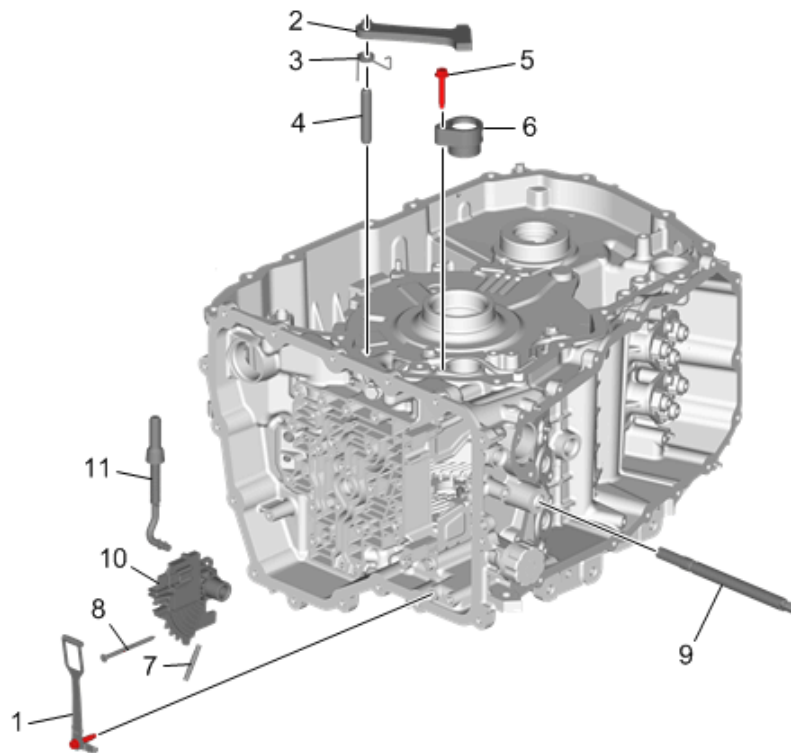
Manual Shift Detent Lever With Shaft Position Switch Assembly And Park Pawl Actuator
